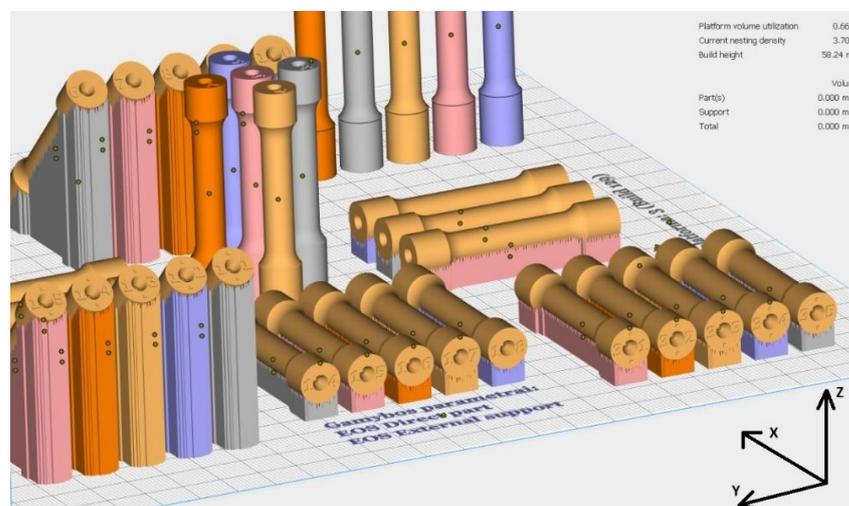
Layout of tensile specimens prepared for manufacturing in M280 machine
